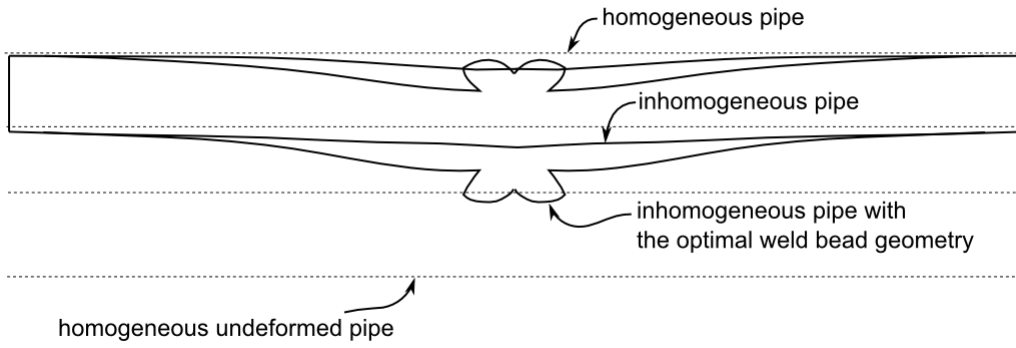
Deformation of welded pipes with different weld geometry (magnified six times)
